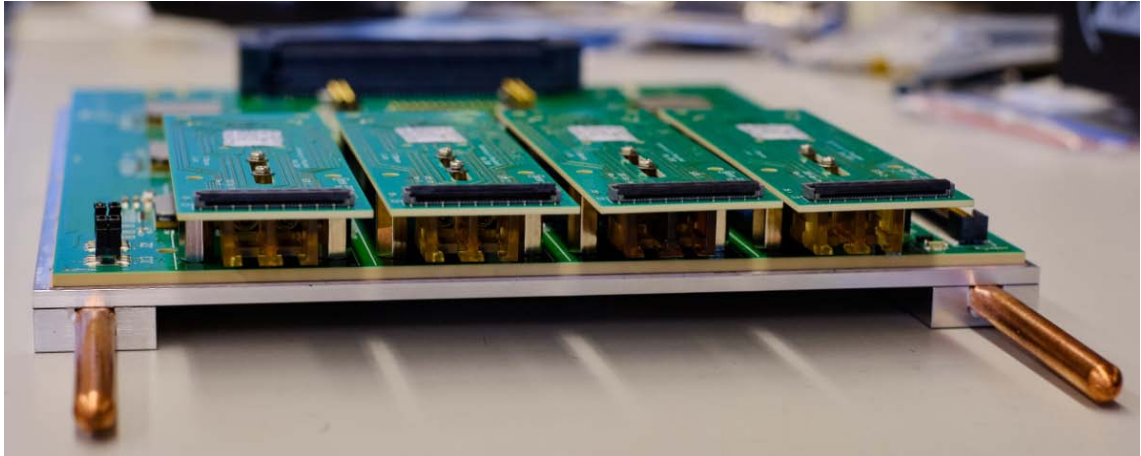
DCB card, gap filler, mezzanine boards with stand-offs and heat spreader [39]
